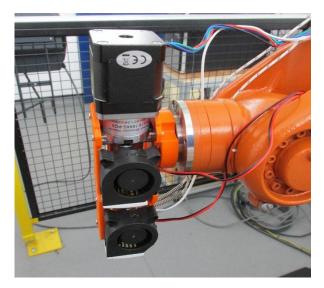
Bespoke Mechanical interface designed and manufactured (Fox.A,2019)
